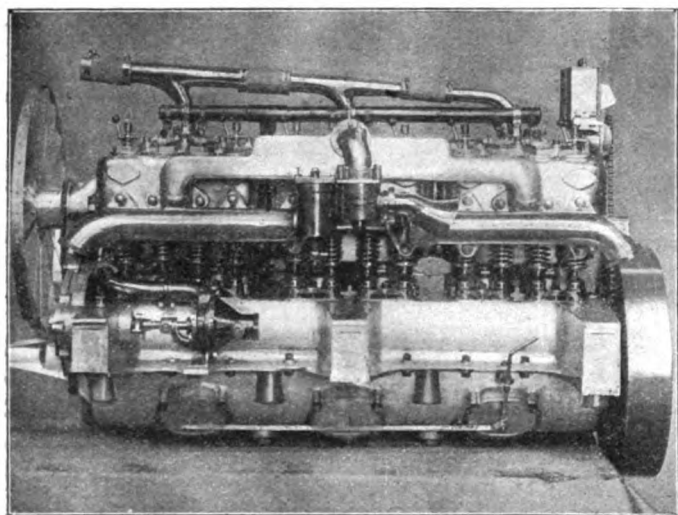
View of Valve Side of Sheffield-Simplex 45-h.p. Six-Cylinder Engine.
